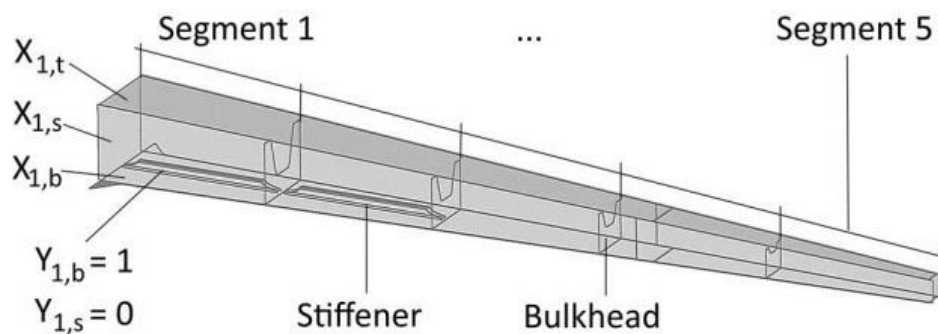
Schematic drawing of a box-type boom structure indicating the dimensioning parameters.
